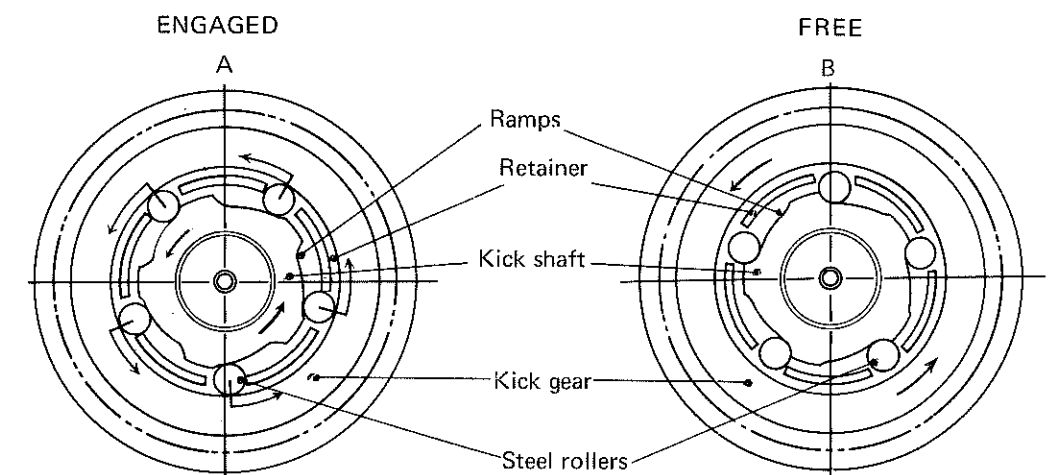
Cross Section View of Kick Starter Drive Mechanism.
